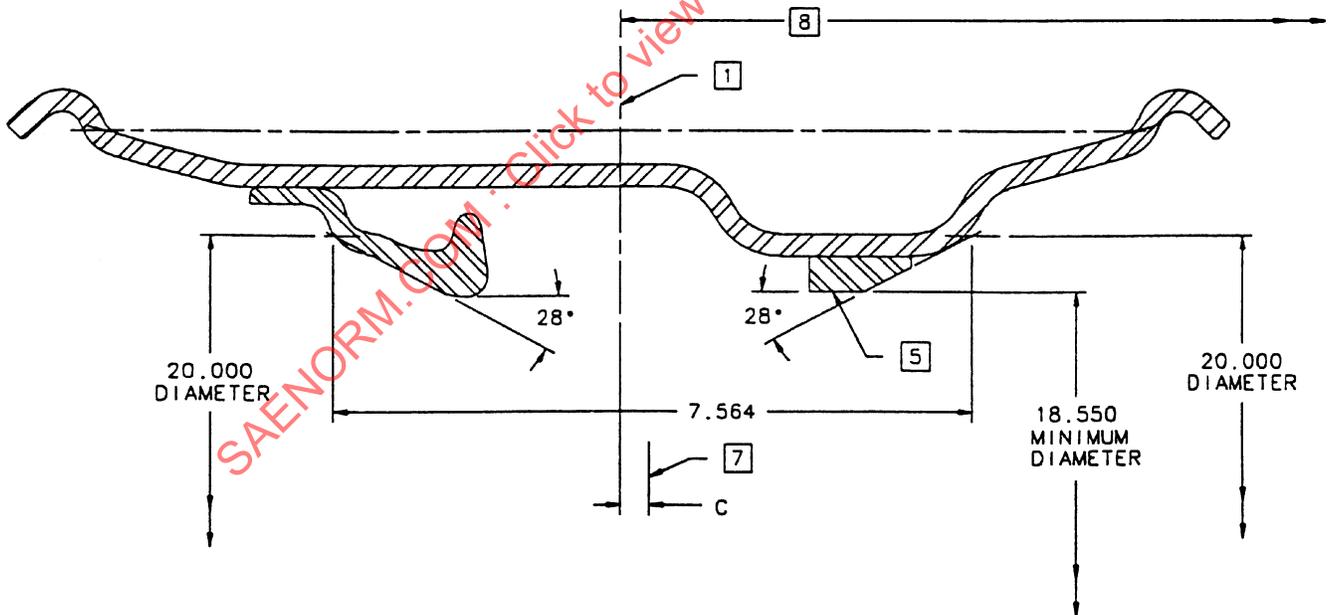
REAR WIDE BASE DEMOUNTABLE RIM
